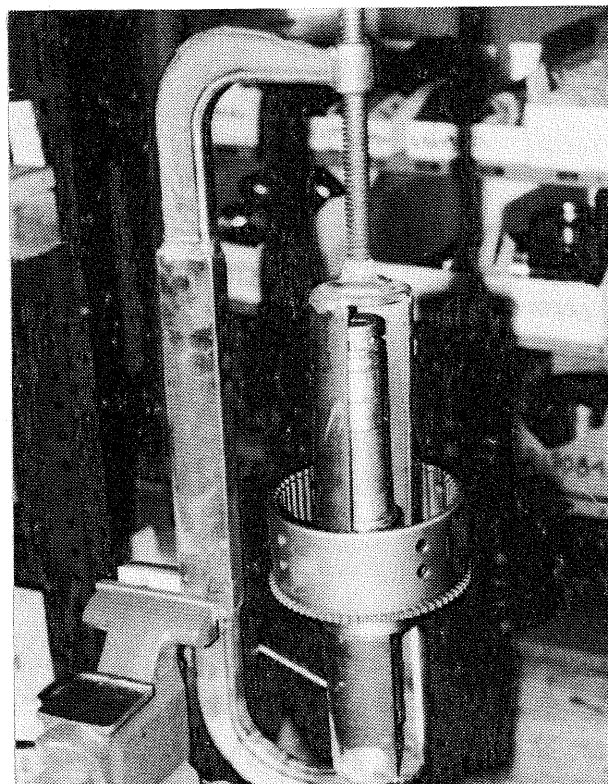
Disassembly of the Clutch (1 of 3)
